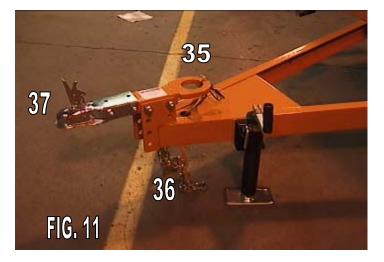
TONGUE ASSEMBLY 35. Taillight Wiring Harness 36. Safety Tow Chains 37. Reversible Hitch (2" Ball and Pintle Hitch)
